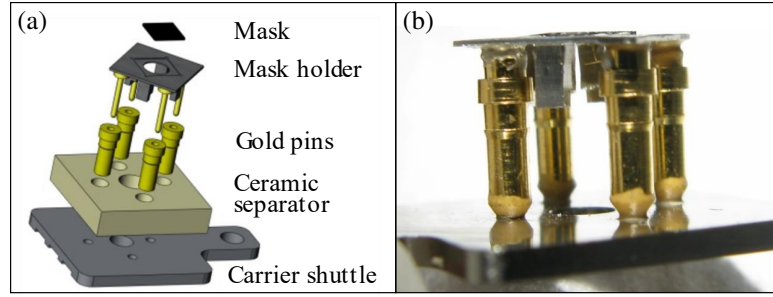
The mask module. (a) Explosive schematic showing the parts of the mask module assembly. (b) Side view of the mask holder inserted into the mask shuttle showing the mask at the highest protrusion.
